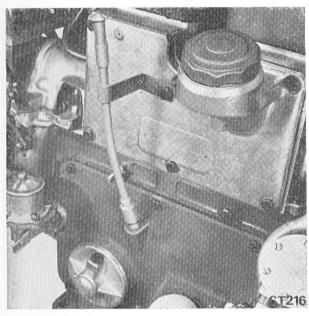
Dipstick Oil Filler and Adaptor Plate—STW
